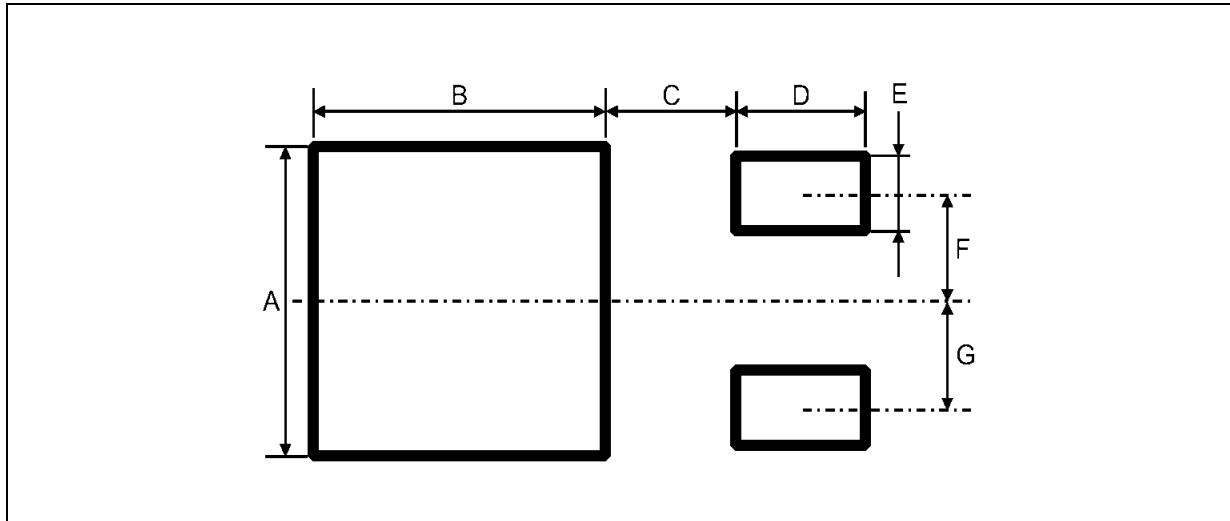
Drawing dimension DPAK (type IDS-subcon.)
